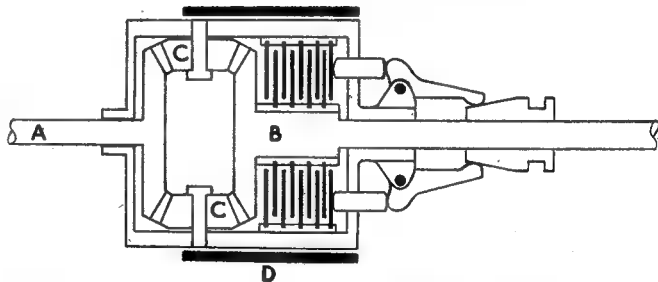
When the multi-plate clutch is engaged, the whole unit rotates as one, giving Ahead. Releasing the clutch and engaging band brake "D" causes the bevel cage to be held stationary; driving shaft "A" then rotates driven shaft "B" via bevel pinions "C," giving Astern. As shown, neither clutch nor brake is engaged, giving Neutral. Clutch and brake are operated by cams on a common shaft
